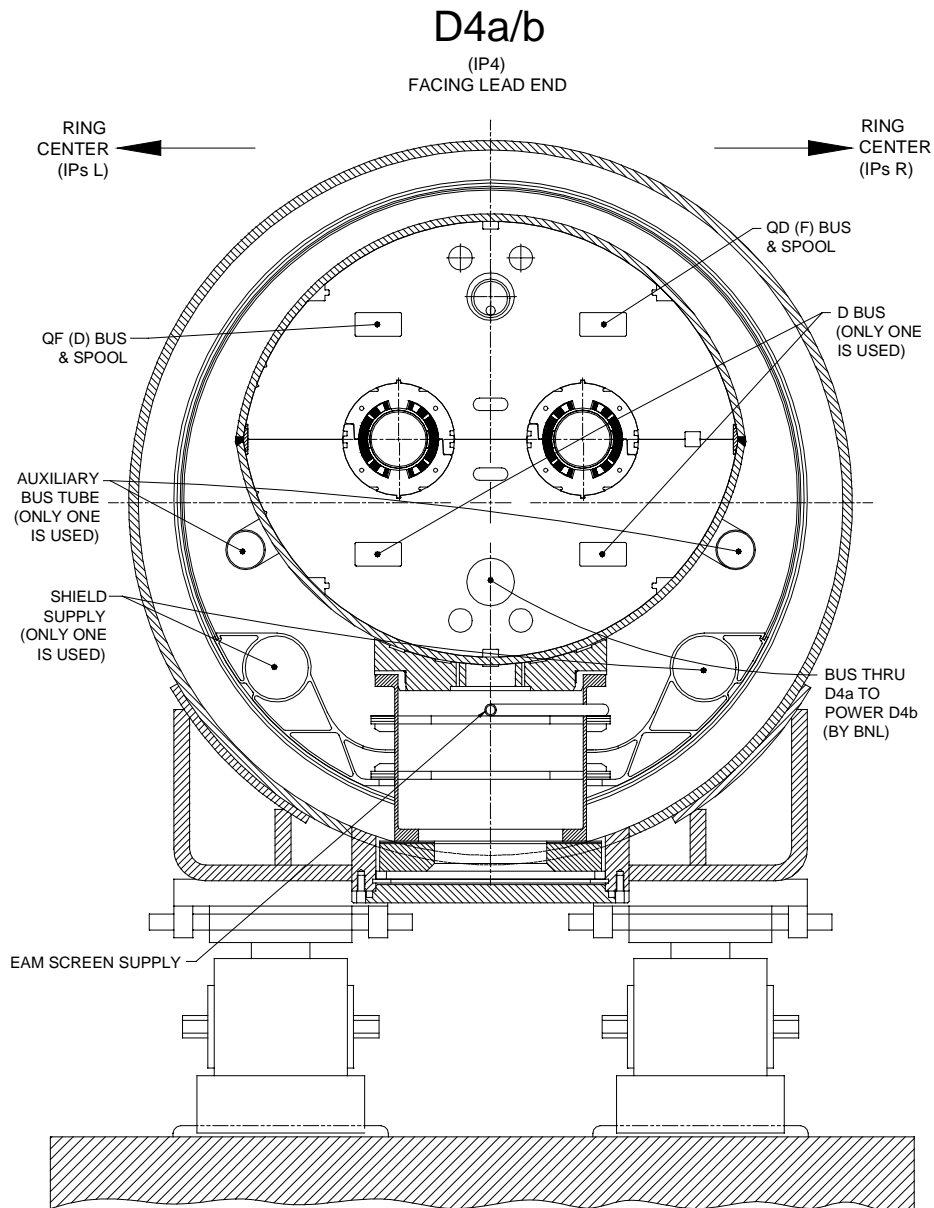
Cross Section of the lead end of the LBRA cryo-assembly with the MBRA (D4a) magnet or the LBRB cryo-assembly with the MBRB (D4b) magnet. There is an LBRA and an LBRB cryo-assembly on each side of IP 4. The cryostat is 914 mm in diameter, the same as in the LHC arc. The MBRA (D4a) aperture separation is 232 mm. The MBRB (D4b) aperture separation is 194 mm. A substantial amount of bus work that services the magnets in the adjacent LHC arc passes through the D4 magnets.
